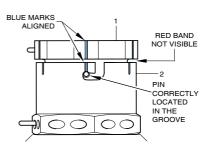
Engine oil - Fill (Sheet 1 of 2)
